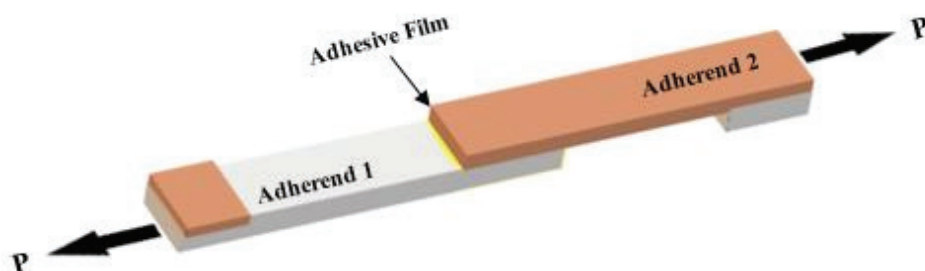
Schematic of lap shear test specimen under tensile loading
